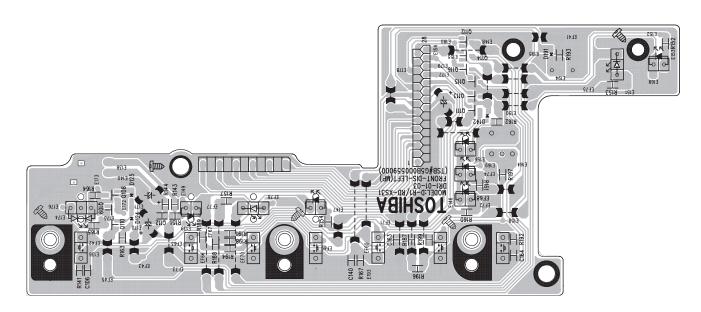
EU03B Front (L) PC Board (Bottom side)
